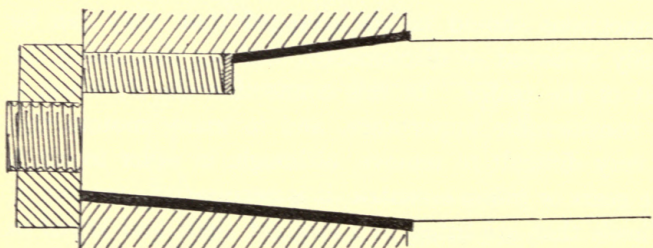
Tapered Fly-wheel Shaft Bushed
